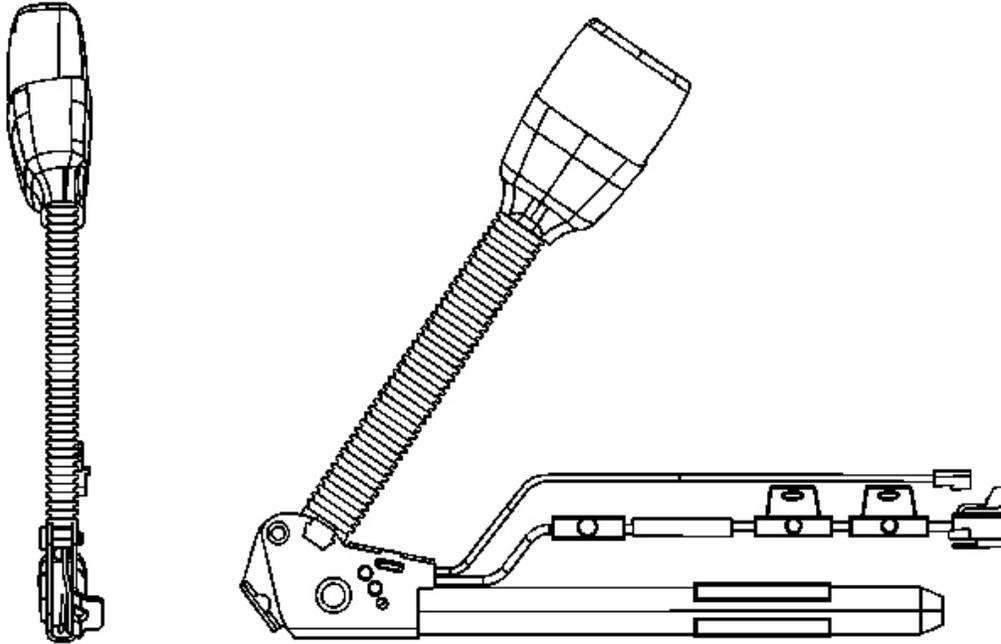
View Of Seat Belt Buckle & Pretensioner
